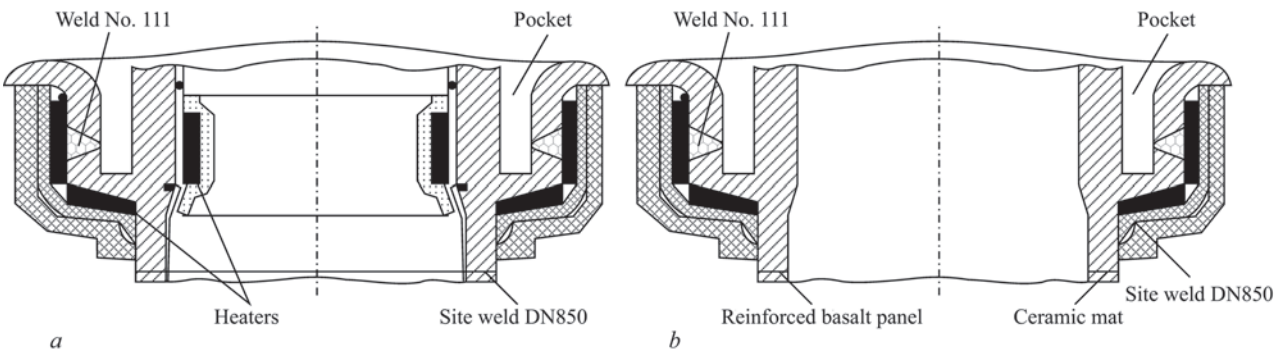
Layout of heaters and heat-insulating materials on welded joint No. 111 during local postweld heat treatment: a — during the manufacture of the steam generator in the factory conditions; b — during the repair of the welded joint at NPP
